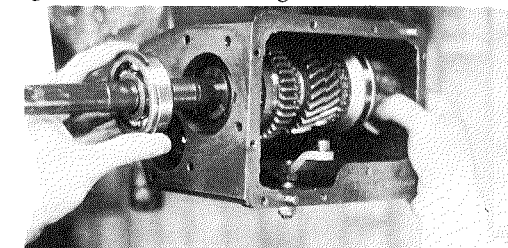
The only 'special tool' used in the whole rebuild - thanks again to Dave McDougal. Make up a plate by sawing the flange off an old gearbox extension. There are lots of these around. Of course, if you're doing a conversion like me you'll already have one at hand. Herald and early Spitfire units are just the same.
